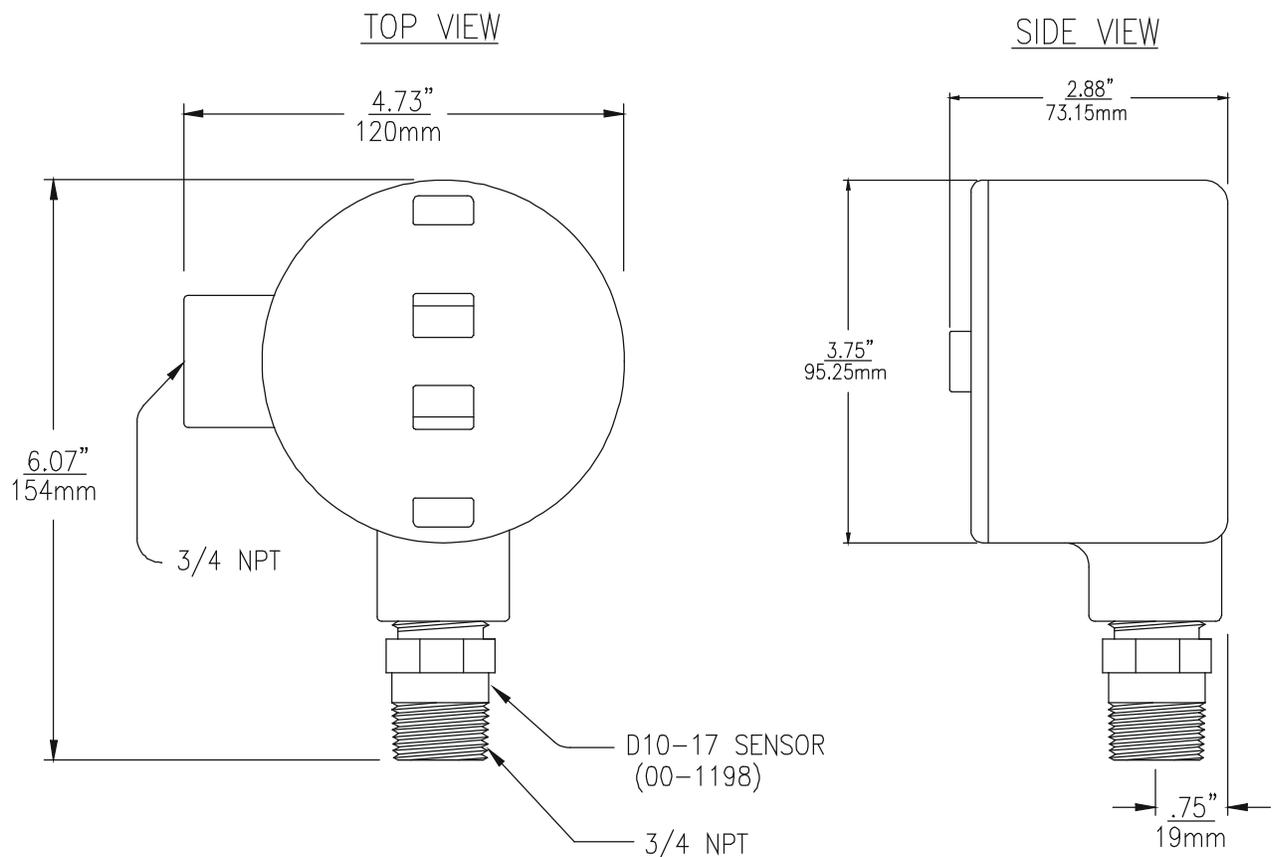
Combustible Gas Sensor/Transmitter Dimensions (ATI-046)
